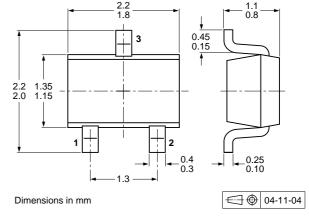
Package outline PDTC114YU (SOT323/SC-70)
